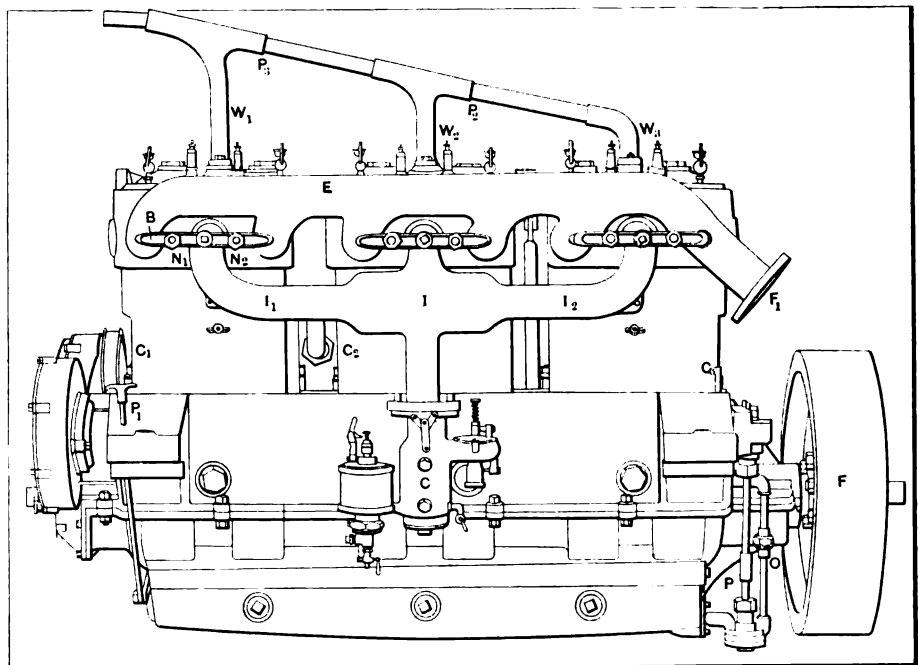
Left-hand side of the six-cylinder motor showing the carbureter and manifolds together with water pump
